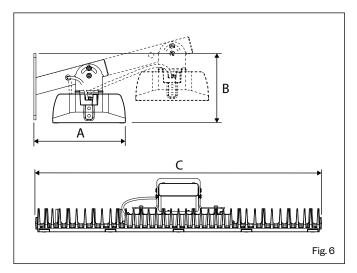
Wall Mount - Overall Dimensions - See Table
